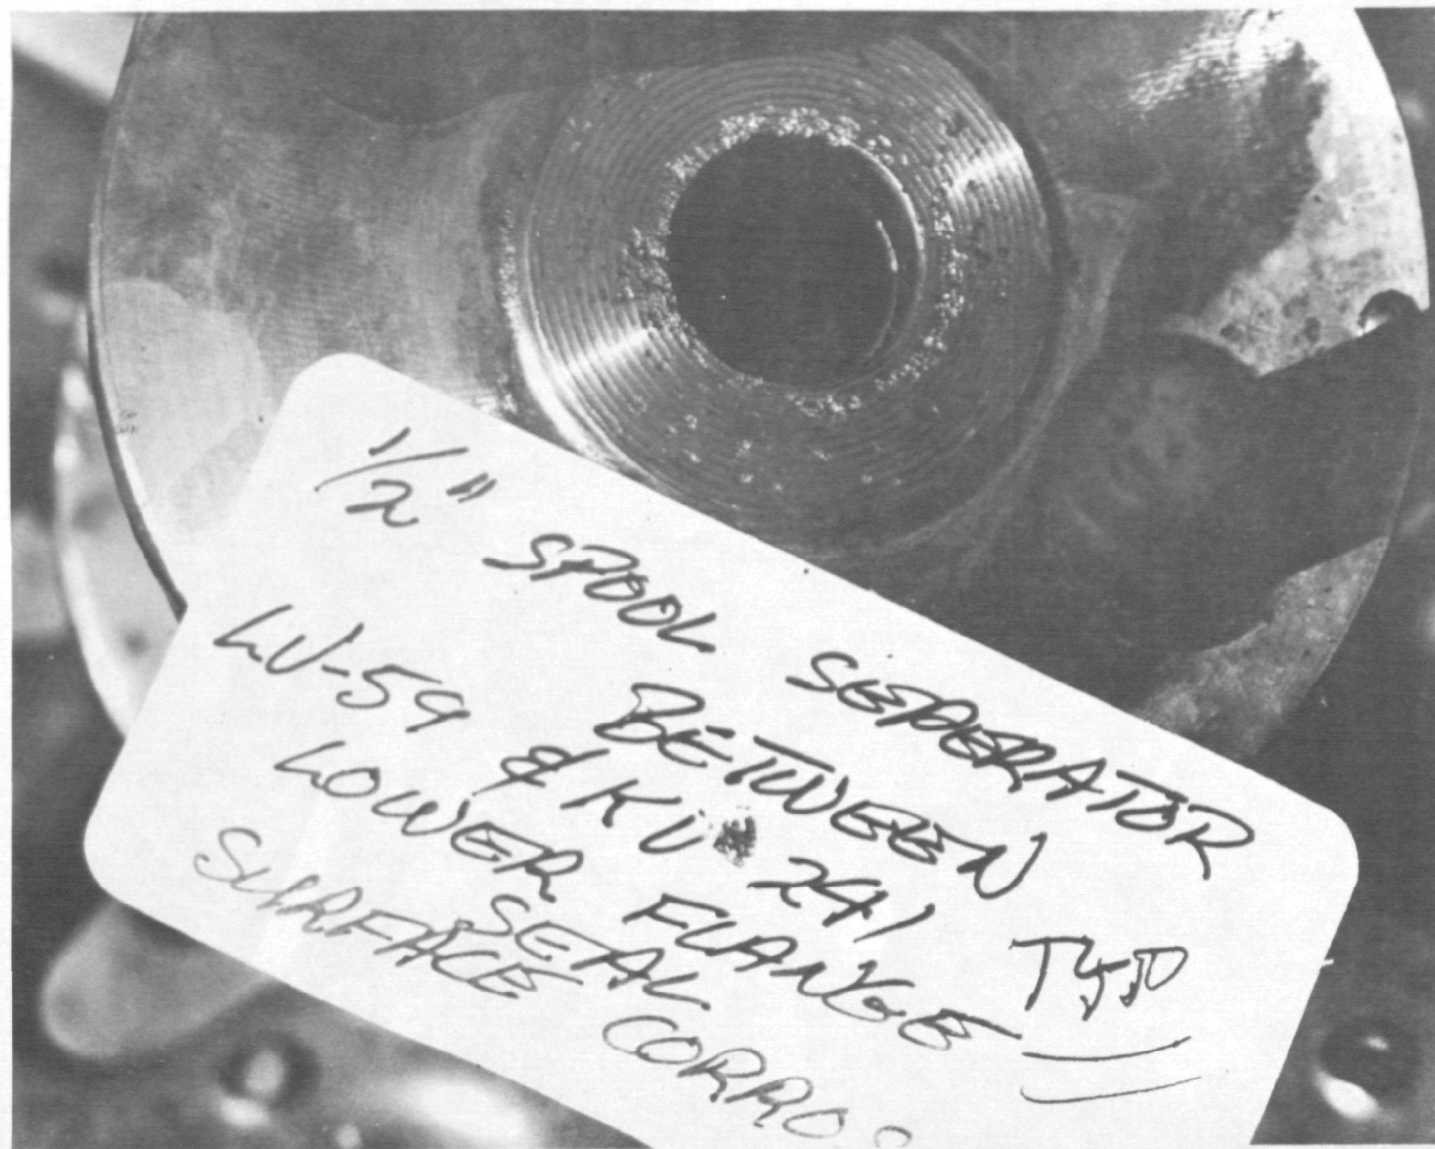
Flange Face on Spool Separating Low Level Control Valve LV-59 and Level Control Valve KV-241.
